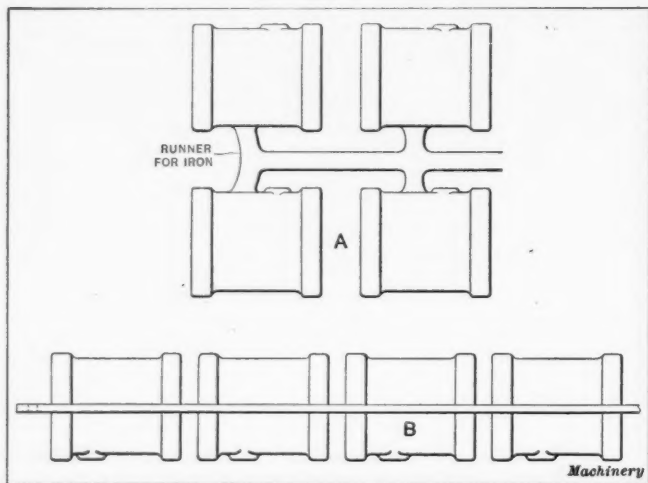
Two Methods of arranging the Pattern and Mold for the Same Piece
